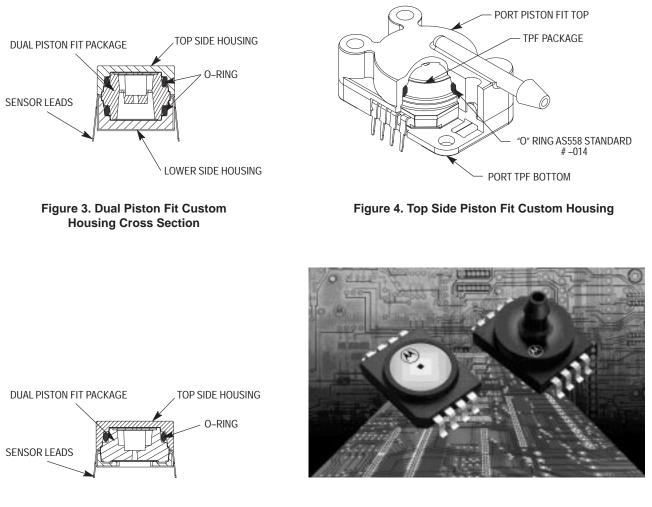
Top Side Piston Fit Custom Housing Cross Section
